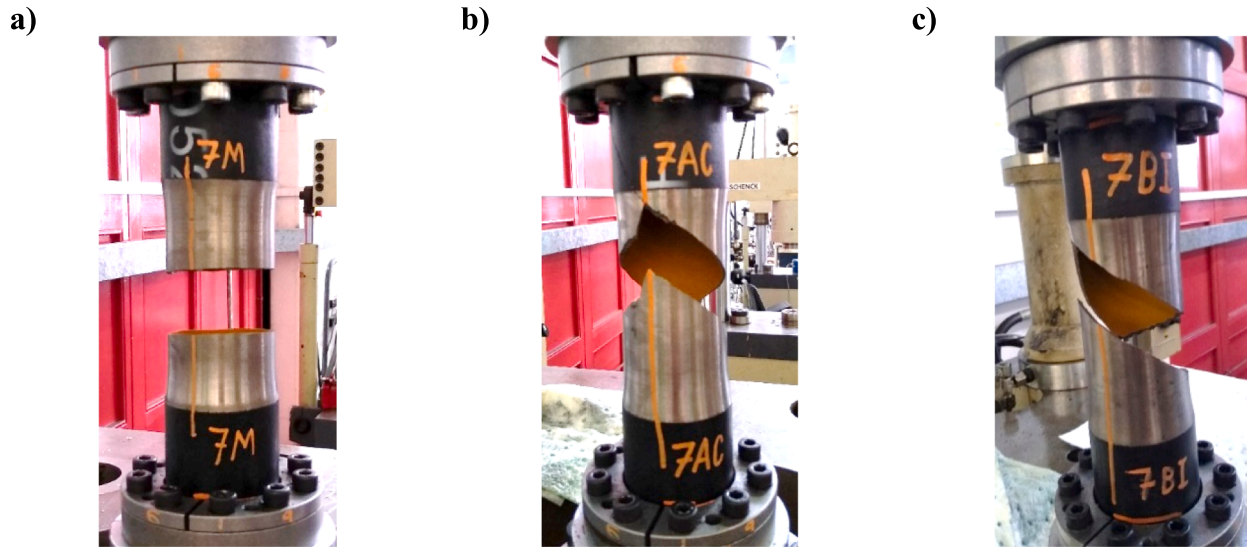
Examples of failed specimens tested under a) uniaxial loading, b) torsional loading, and c) out-of-phase tension-torsion loading.
